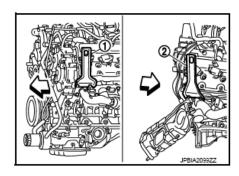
Identifying Engine Front And Rear Slingers Courtesy of NISSAN MOTOR CO., U.S.A.
